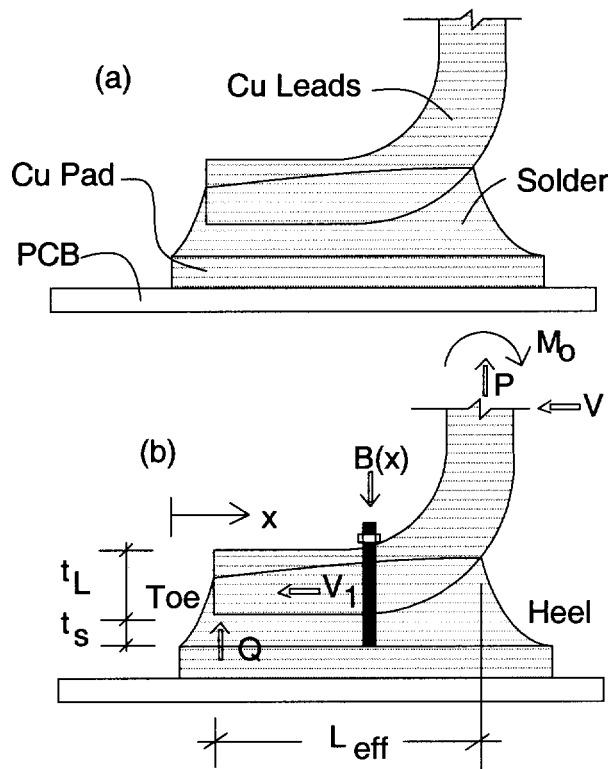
(a) Schematics of Leaded Solder Joint and (b) Equivalent Bolted Solder Joint Connection with Applied Forces
